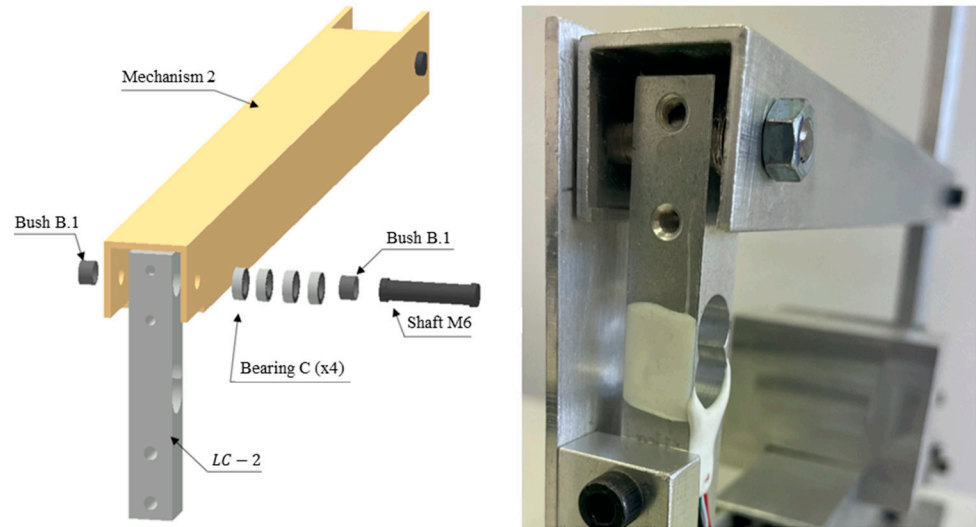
3D view (left) and manufactured assembly (right) for the drag measurement.
